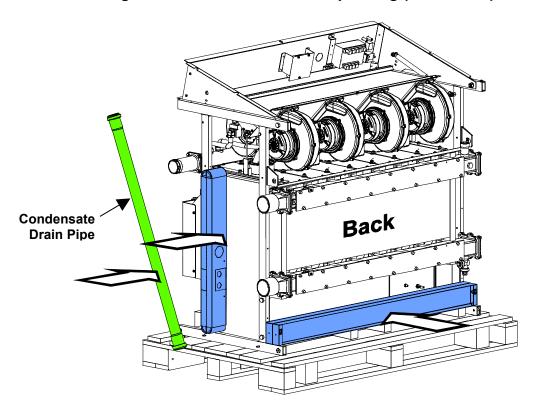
MODULEX EXT Unpacking (Rear View)
